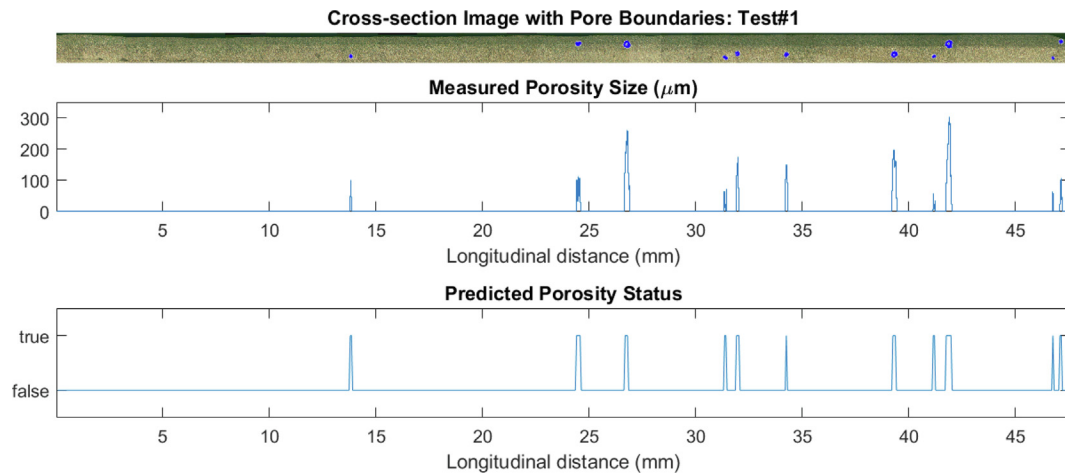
Porosity occurrence detection for laser welding: training set Test#1.
